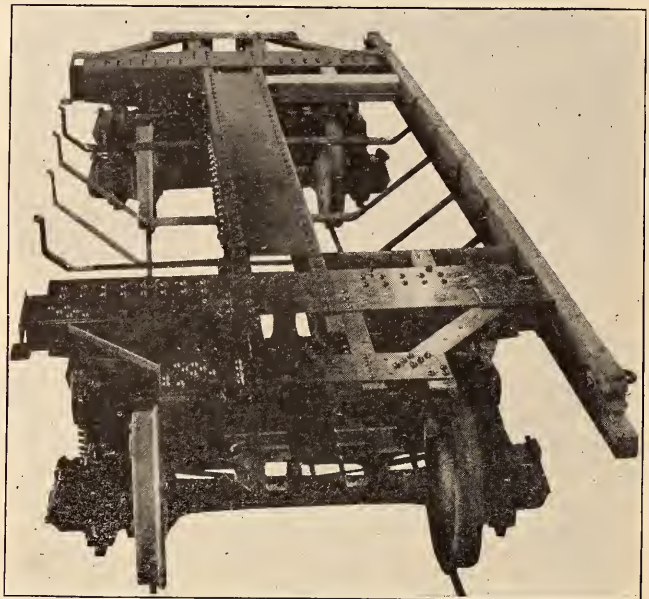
UNDERFRAMING OF HOPPER CAR WITH STEEL CENTER SILLS.
